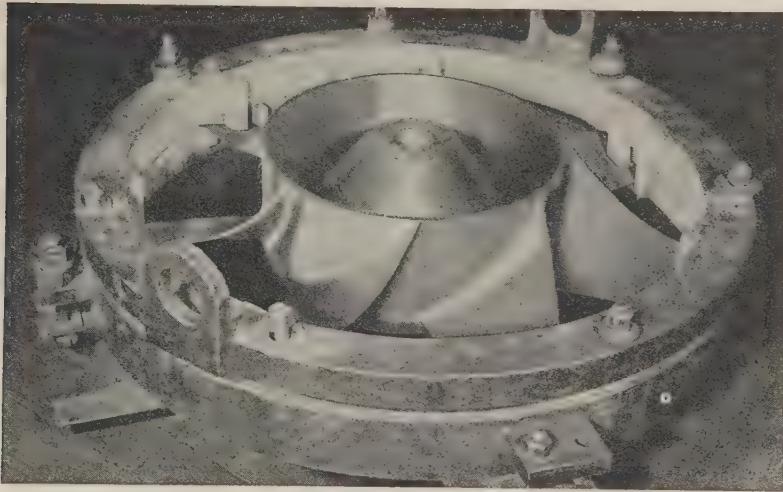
HIGH-SPEED FAN, AND JIG IN WHICH IT IS WELDED
